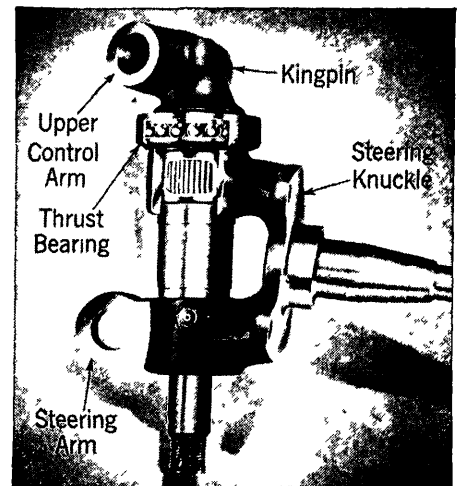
Construction of steering knuckle and kingpin, 1939-40 Champion and all 1941-46
